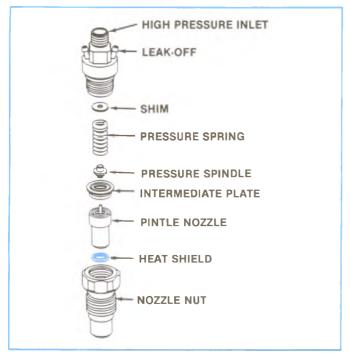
, Nozzle Holder Assembly, Exploded View.
